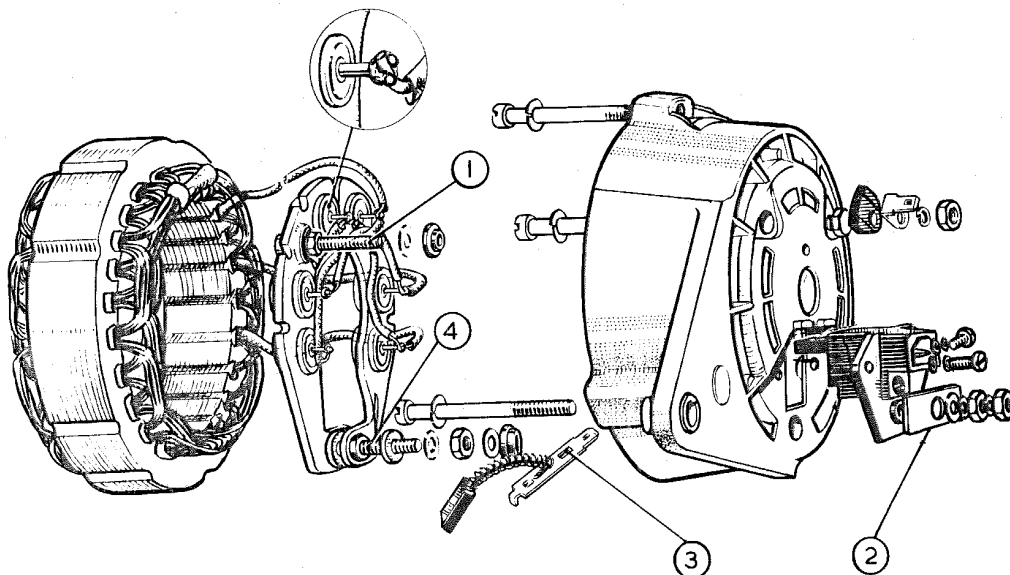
Slip-ring end, showing heat sinks withdrawn
